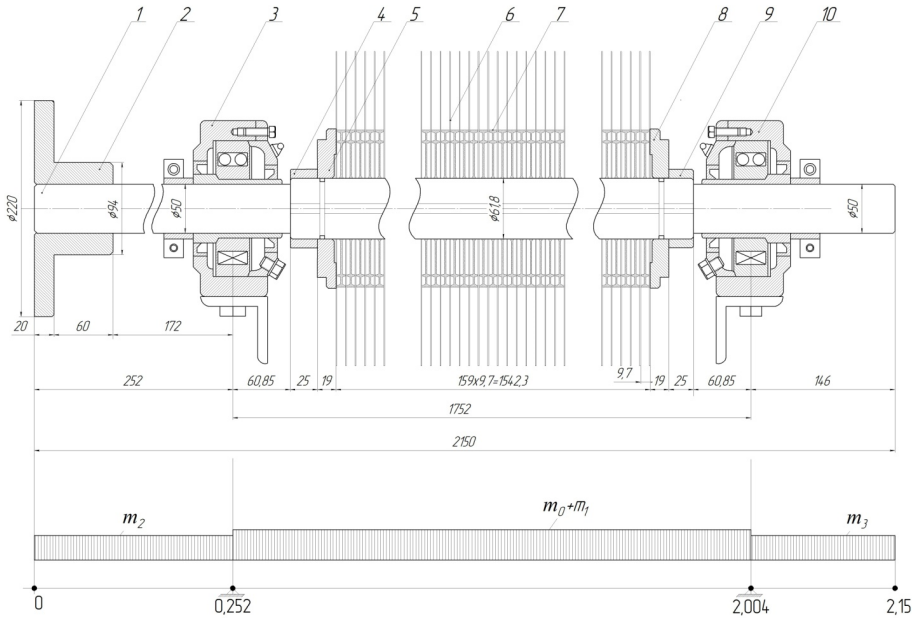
Assembly drawing and diagram of loads acting on the saw cylinder of the linting machine: 1 – Shaft, 2 – Half coupling; 3, 10 – Bearing housing; 4, 9 – Nuts; 5, 8 – Washers; 6 – Saw disks, 7 – Spacers.
